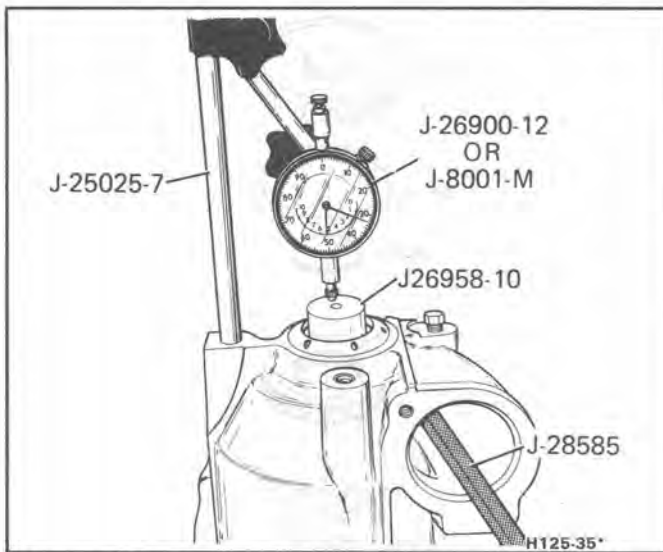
Final Drive End Play Selective Thrust Washer (680) Measurement
